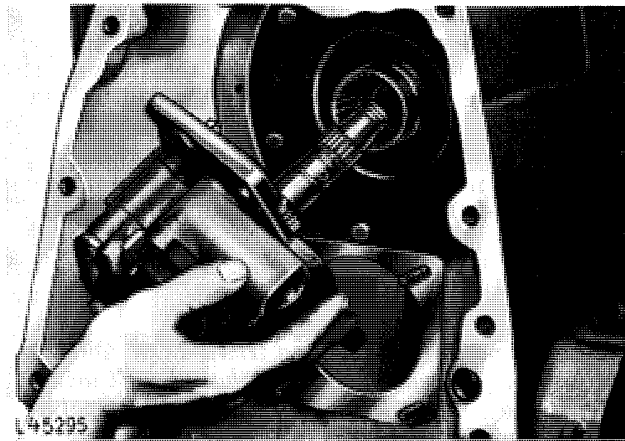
Removing Oil Manifold with Transmission Oil Pump
